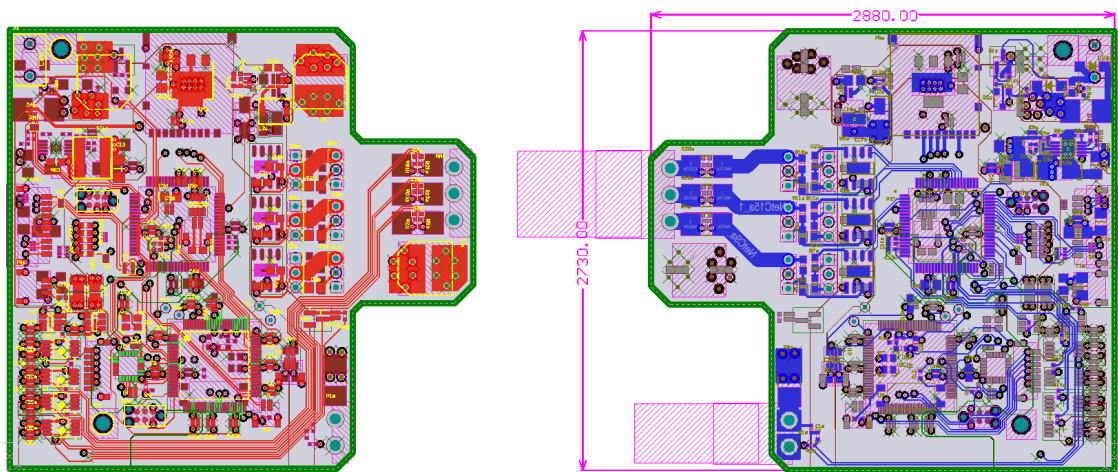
PCB design software rendering of board design with the top layer shown on the left and the bottom layer and board dimensions shown on the right.
